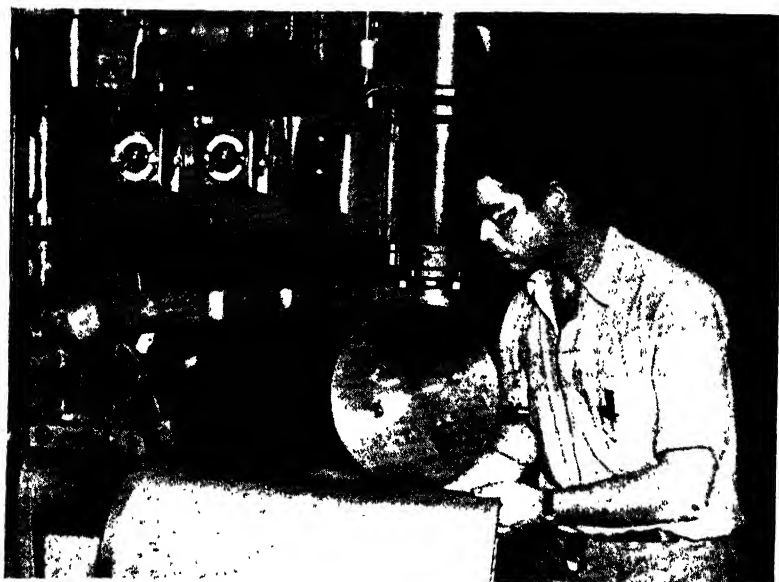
Spot-welding with Roller Type Electrode
